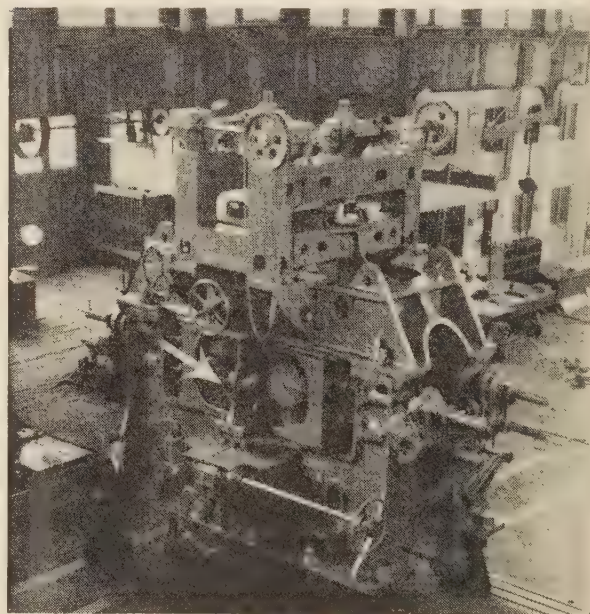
ASSEMBLY OF ELONGATOR STAND
